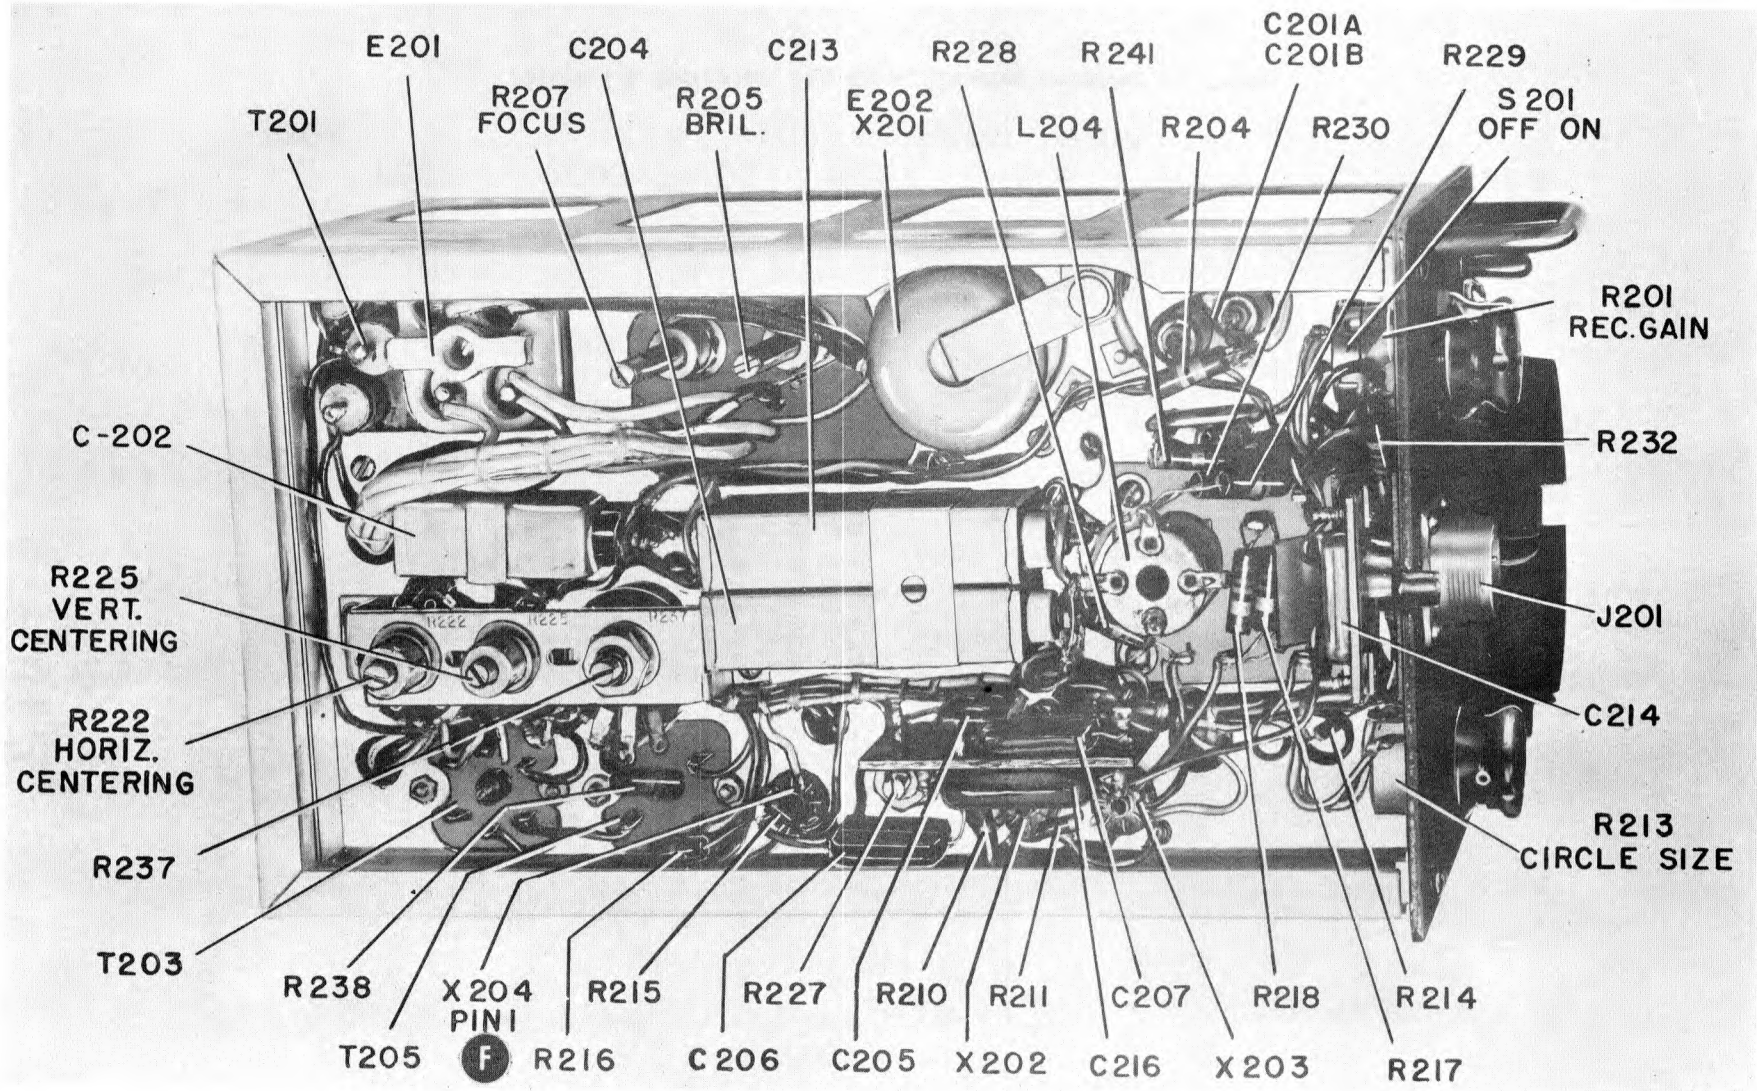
Indicator, Bottom View, Showing Location of Parts
